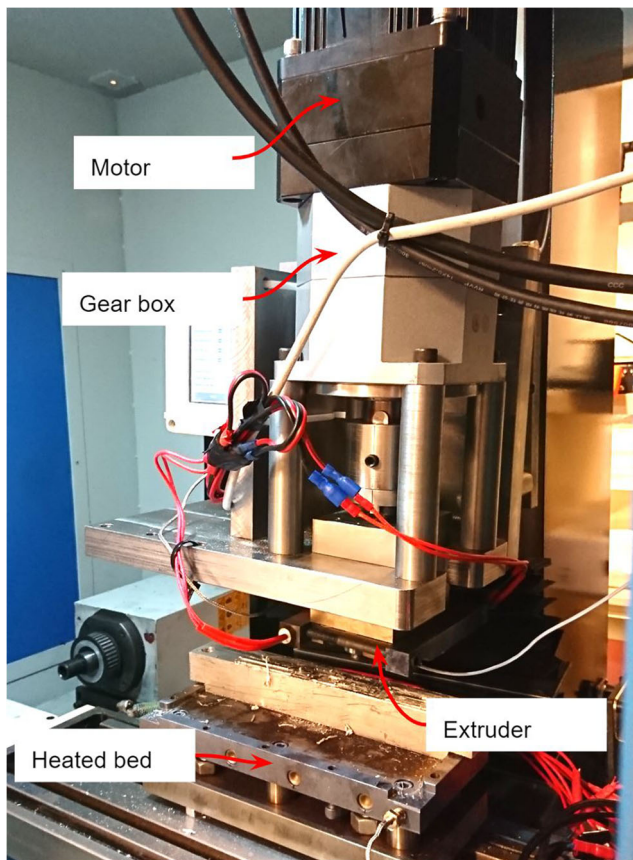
The extruder attached to a CNC milling machine. A heated bed is used to control the temperature of the deposited structure
